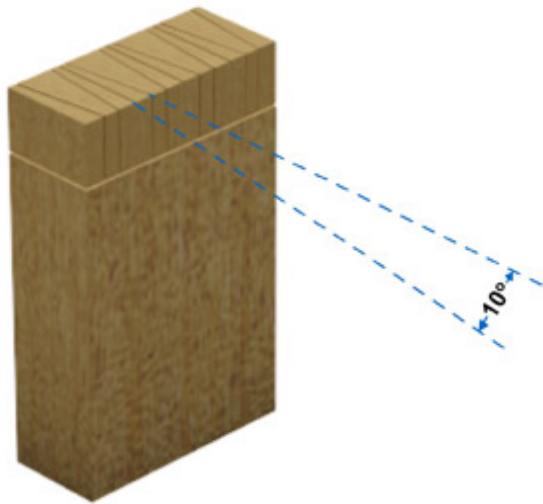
Laying out a pin member for a through multiple dovetail joint.
